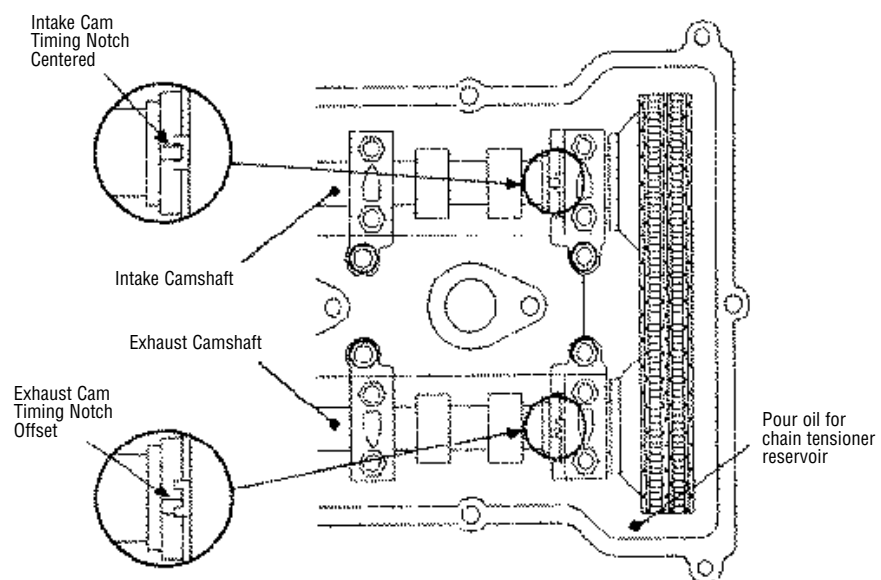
WITH BAVARIAN AUTOSPORT EXHAUST CAM GEAR
